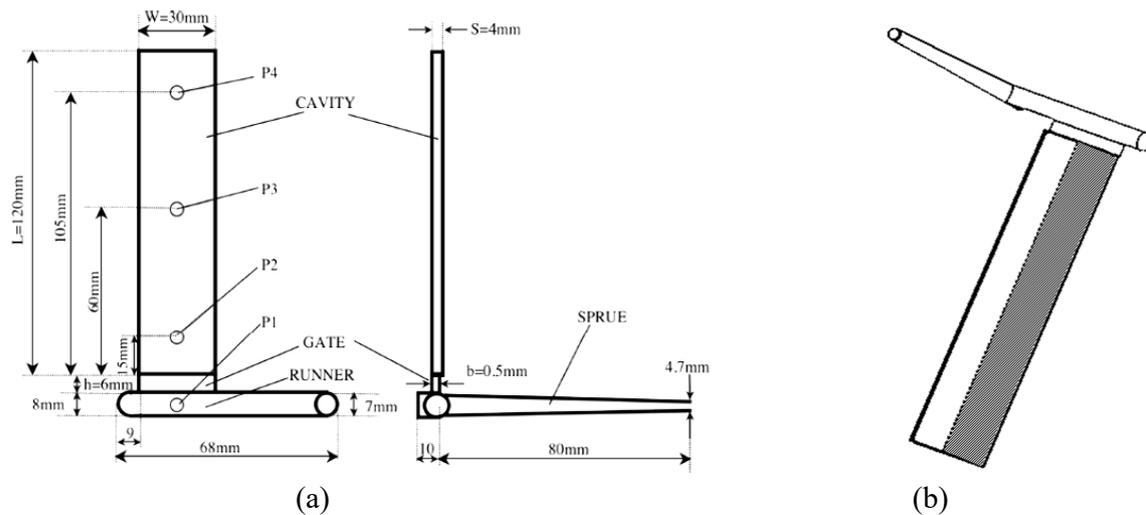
(a) Schematic view of the cavity. (b) Gray part of the sample represents the specimen used for mechanical tests
